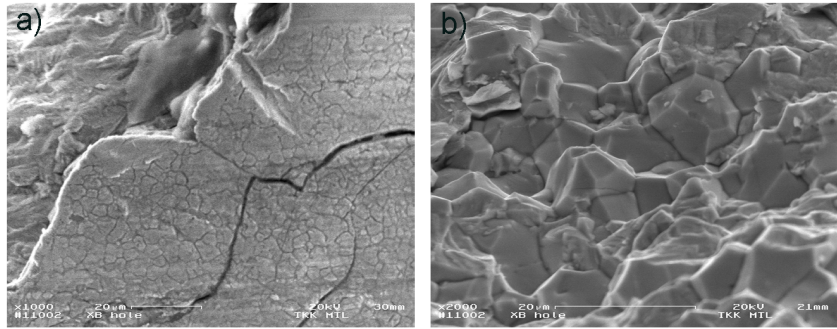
SE images of a) the fracture surface from the crevice side and b) intergranular fracture surface of a spot weld of EN 1.4301 2B steel cracked by stress corrosion. [Publ. I]
